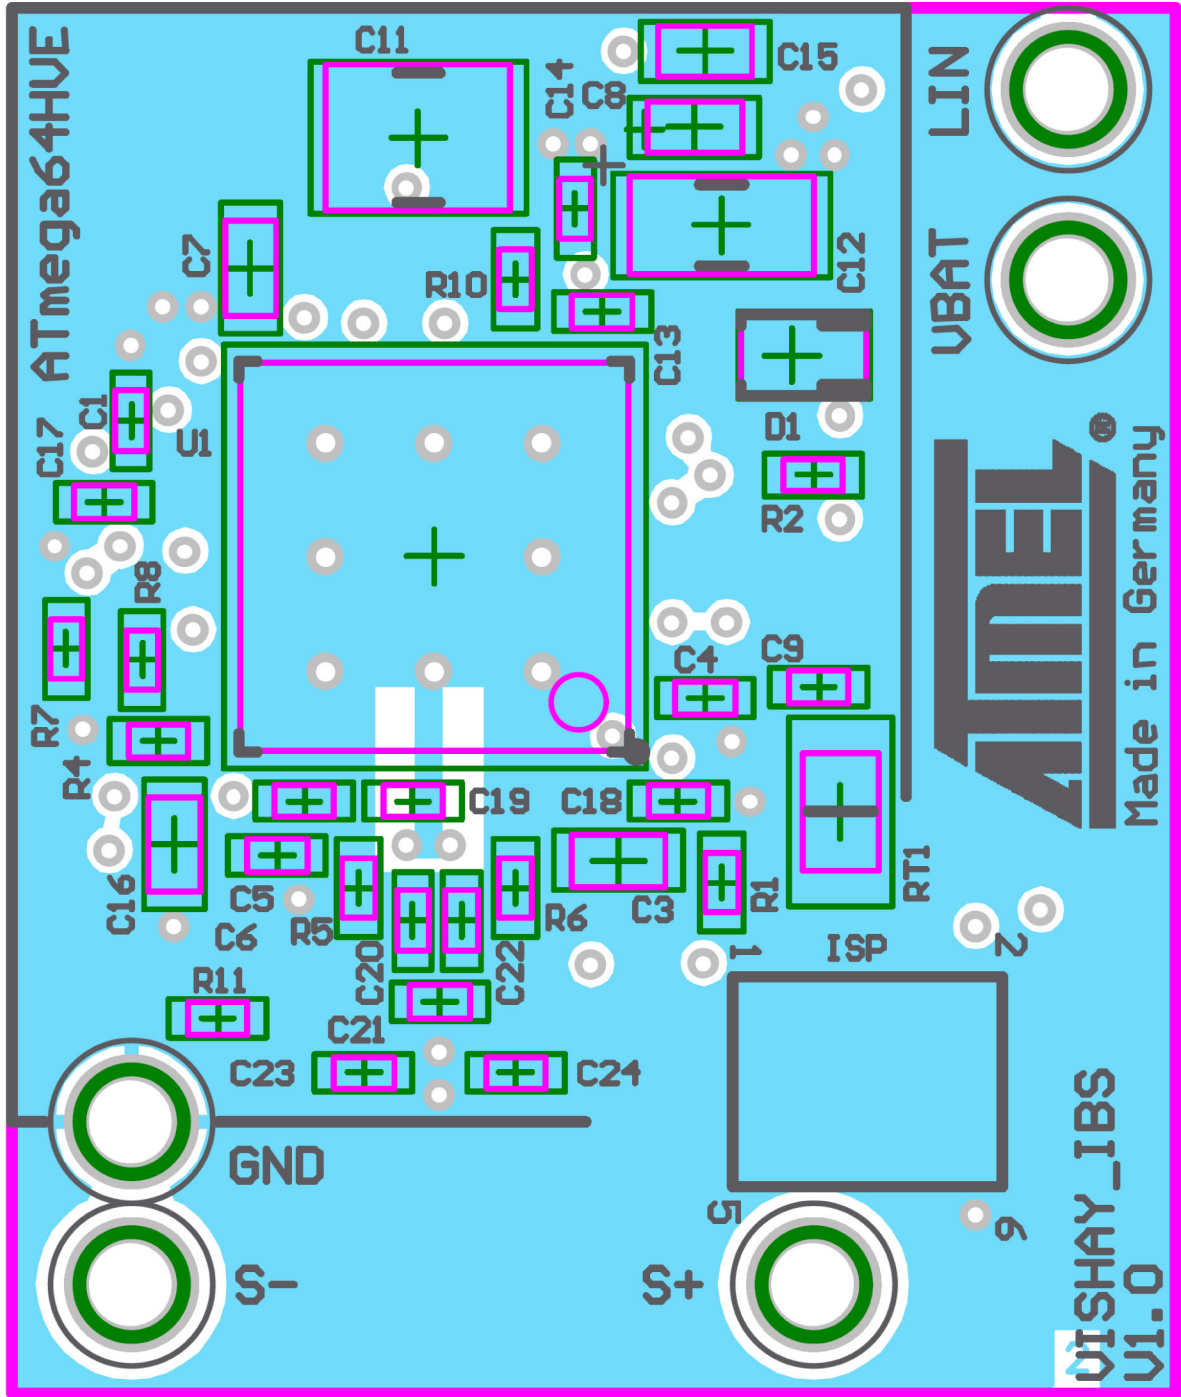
PCB Layout of Reference Design, Mid Layer 2 (View: Top Layer)
